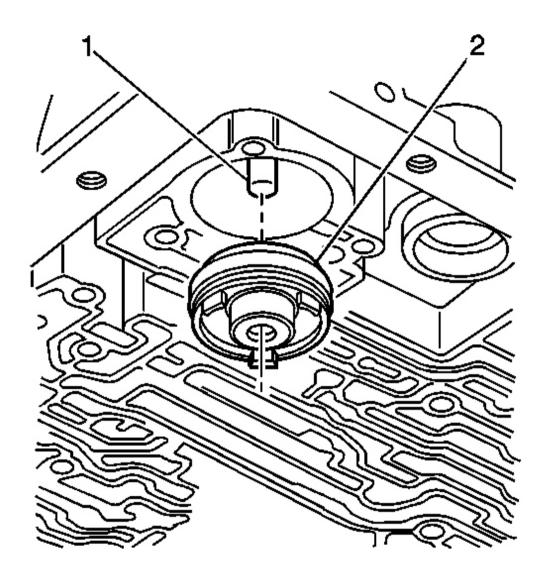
Identifying 3-4 Accumulator Piston Courtesy of GENERAL MOTORS CORP.
